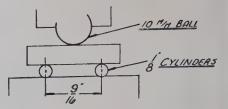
Arrangement for transverse rupture testing. Specimen cross section is 0.200 in, thick \times 0.375 in, wide.
